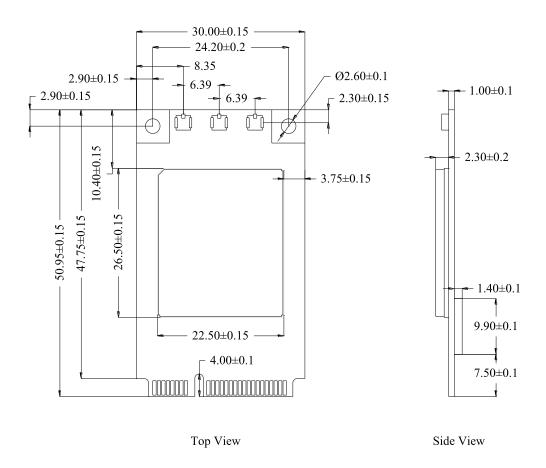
Mechanical Dimensions of BG96 Mini PCIe
